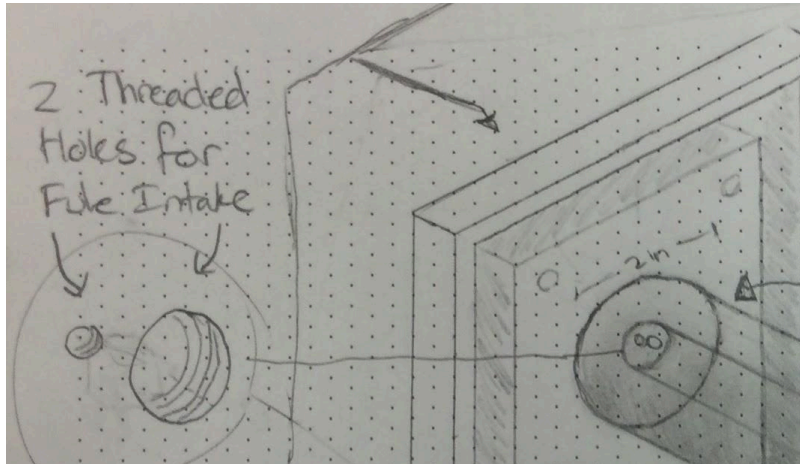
Exploded View of Figure 2. Our preliminary design consisted of having two threaded holes for the oxygen and the propane to flow through.
